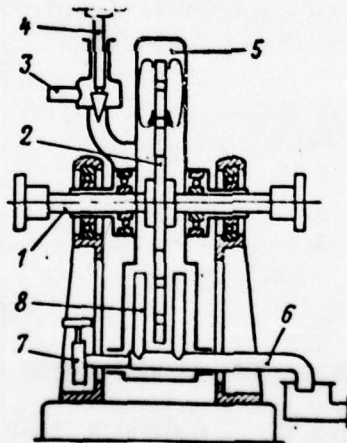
Schematic diagram of hydraulic brake. 1 - shaft, 2 - brake disc, 3 - water supply, 4 - valve/gate, 5 - the housing of stator, 6 - drain, 7 - worm gear, 8 - rotary branch connections.
